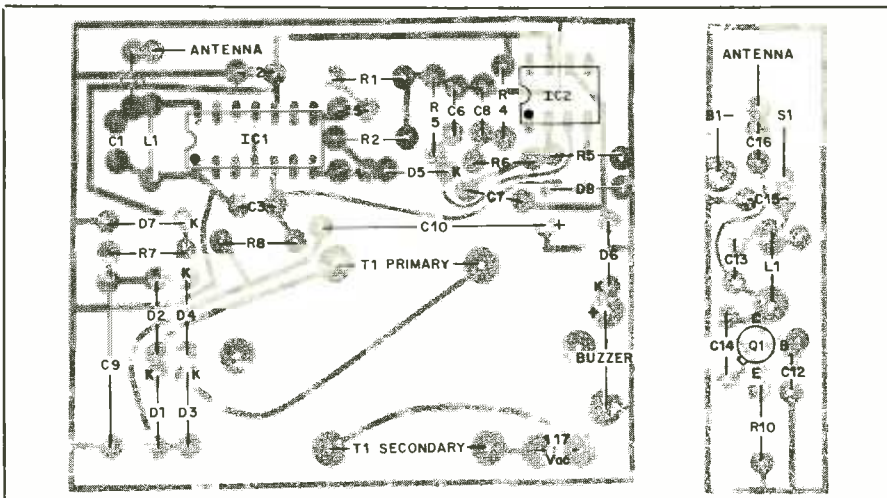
Wiring guides for receiver (left) and transmitter (right) boards.
